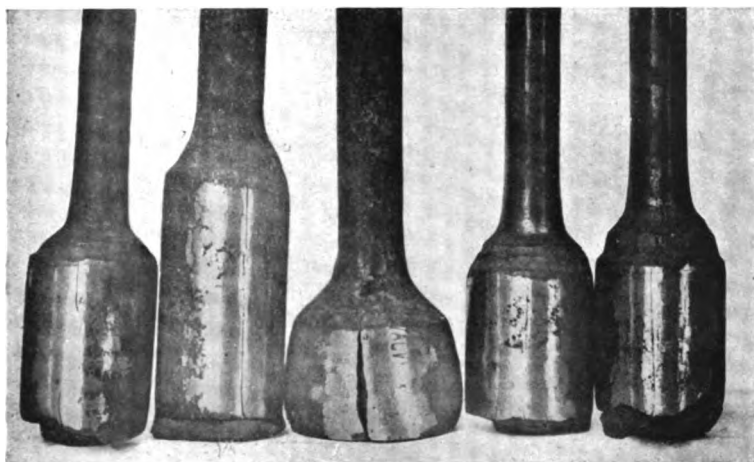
ALLOY STEEL FORGINGS MADE FROM BILLETS SIMILAR TO THOSE SHOWN IN FIG. 70.
